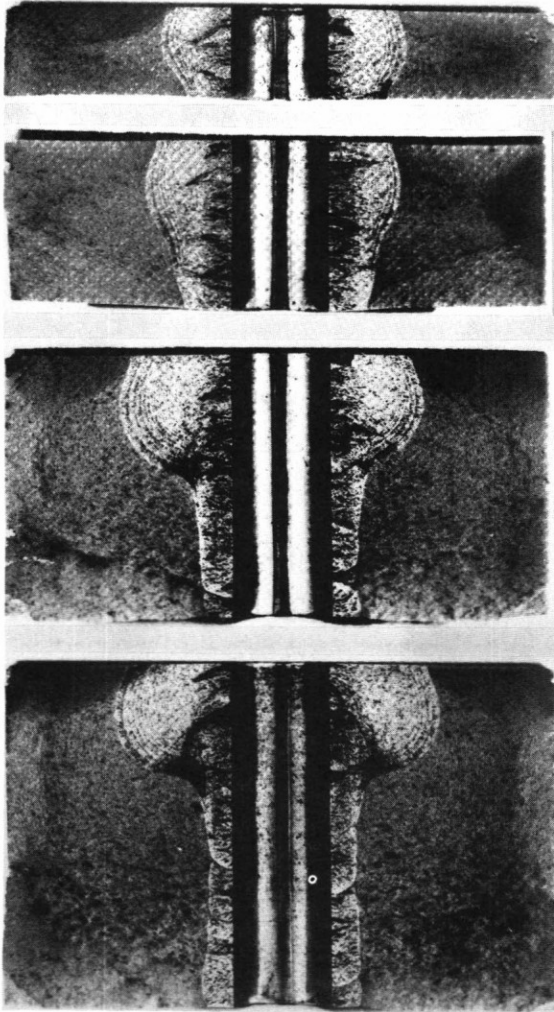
Fatigue fractures of cold-expanded hole specimens of 8, 15, 23 and 30 mm thickness, mandrel entry faces at top
